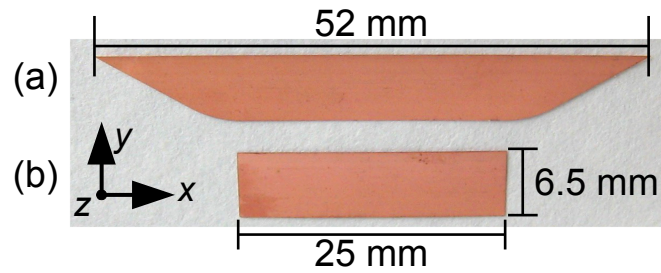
Top view of offcut piece from Roebel cable manufacture (a) before and (b) after trimming.
